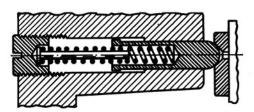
With a long spring and a fairly short plunger, a common flat-head wire nail can be used to support the spring against buckling. The spring also fits closely into the plunger hole to gain support, and the plunger is flanged at its upper end to prevent its slipping through the hole.
